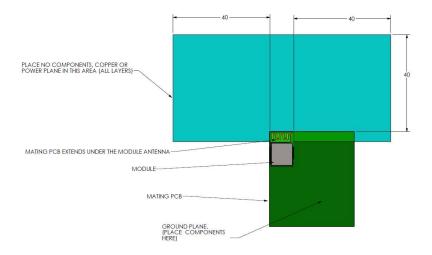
N5 M8 Module Mounting (all dimensions in mm)
